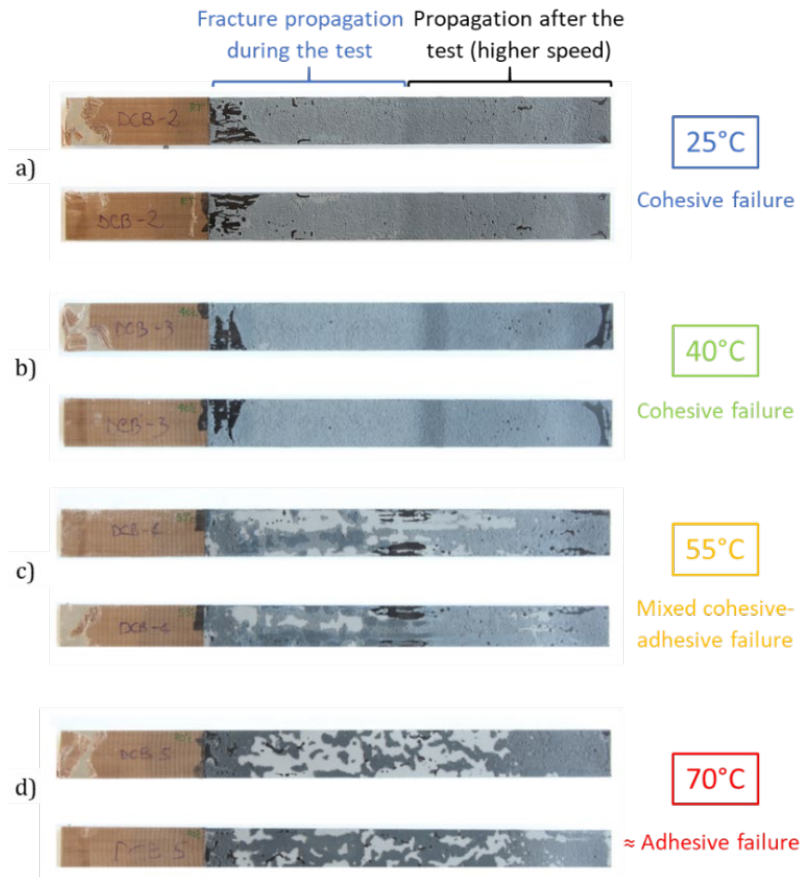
Fracture adhesive surface of DCB tests on NS epoxy at: a) RT; b) 40°C; c) 55°C; d) 70°C.
